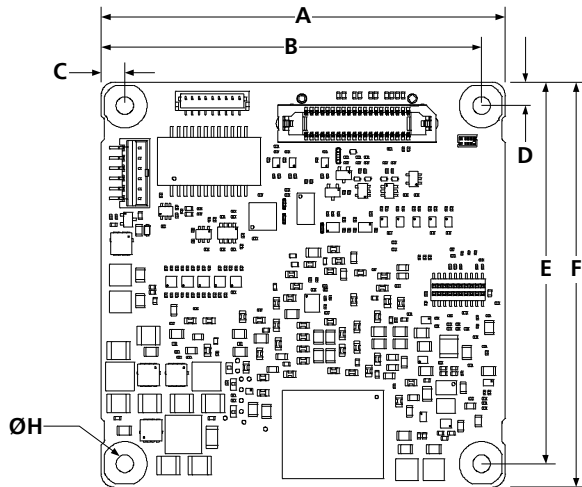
FETK-T3.0 Dimensions - Top View
